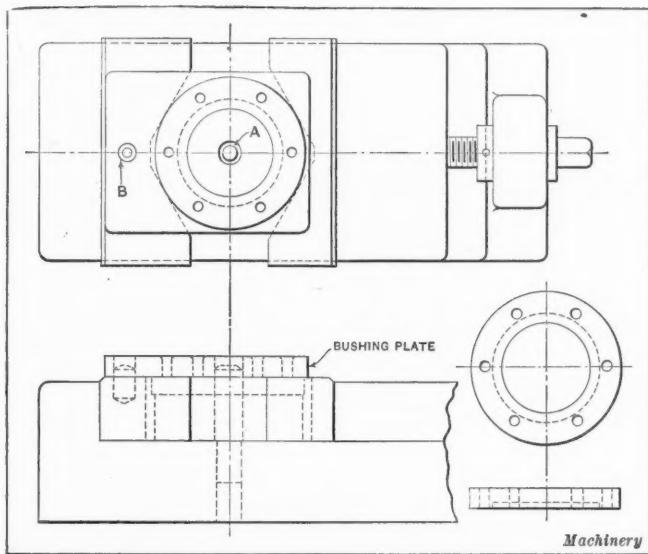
Drilling Holes on a Circle with Removable Bushing Plate
